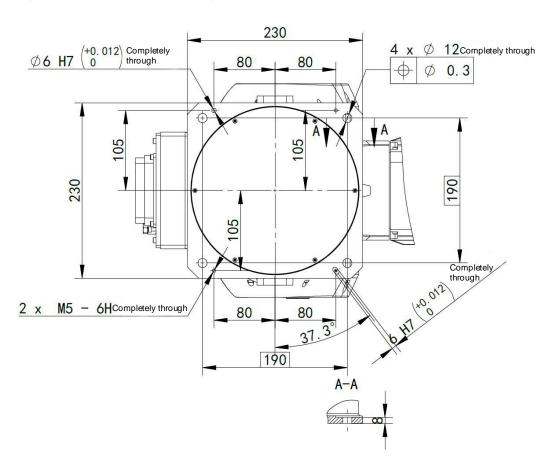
Mounting Dimensions of GBT-P7A Robot
